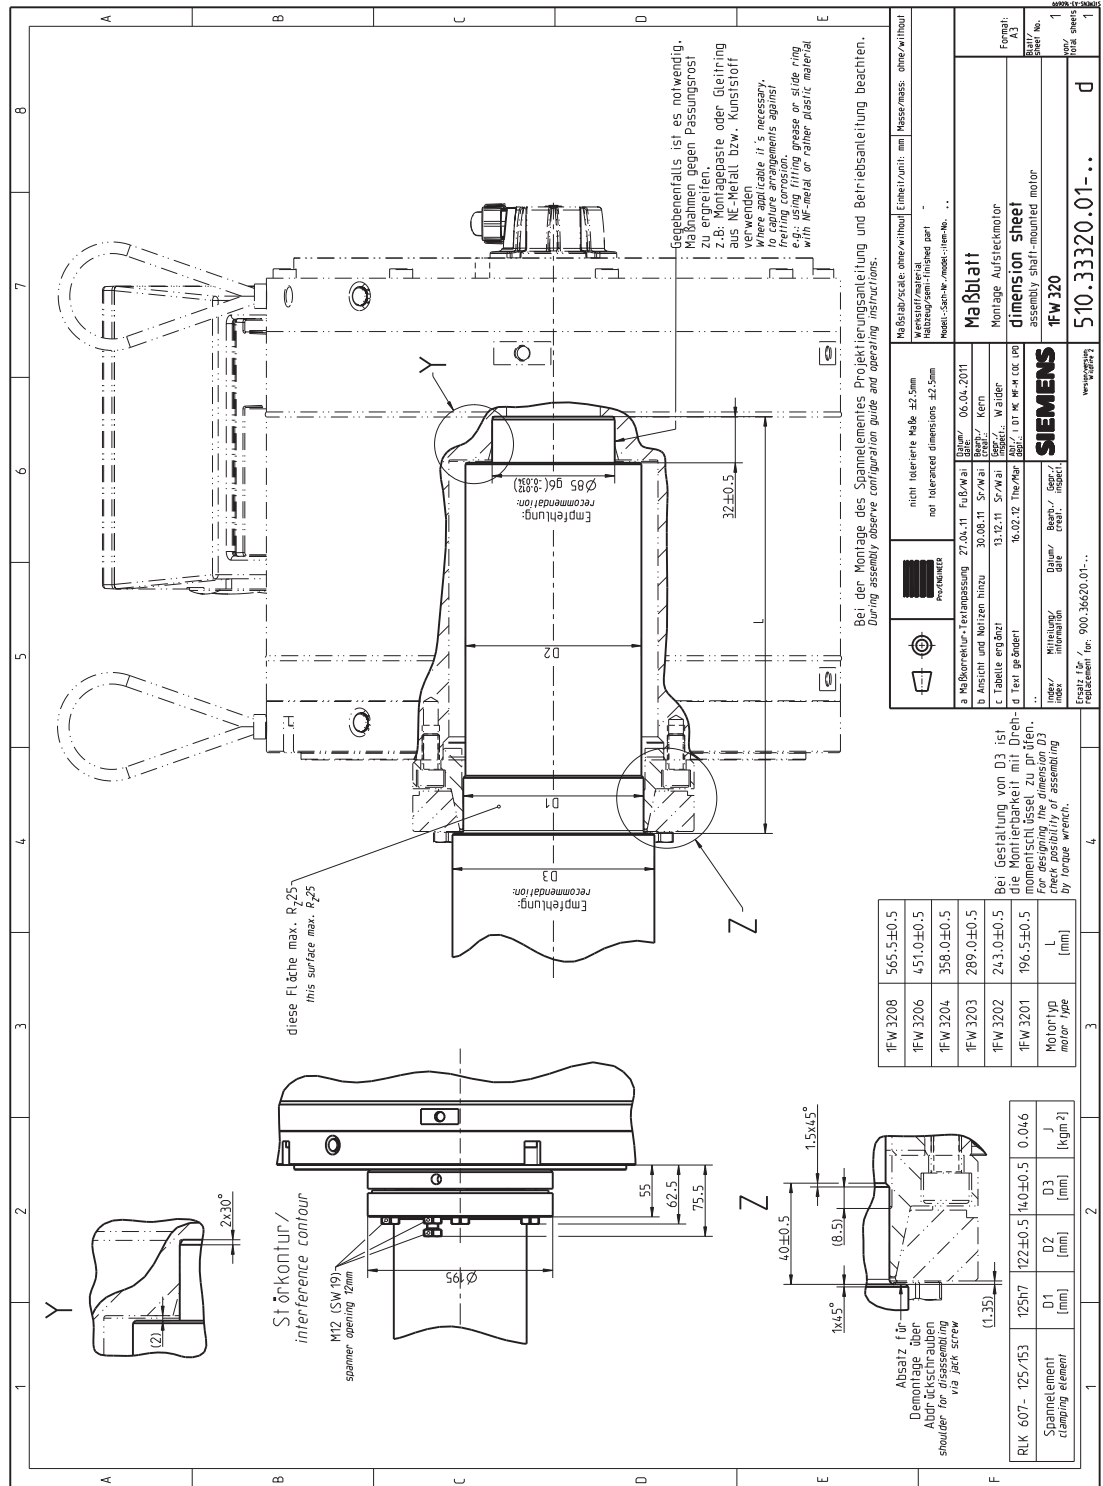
Dimension drawing, mounting plug-on motor 1FW320
